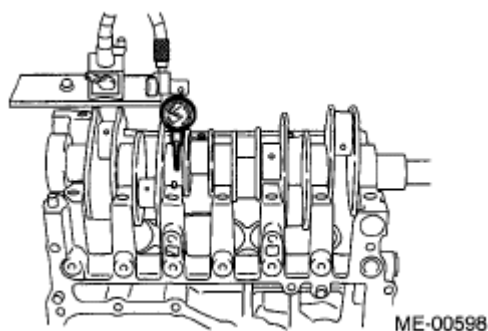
Checking Crankshaft Bend Using Dial Gauge
